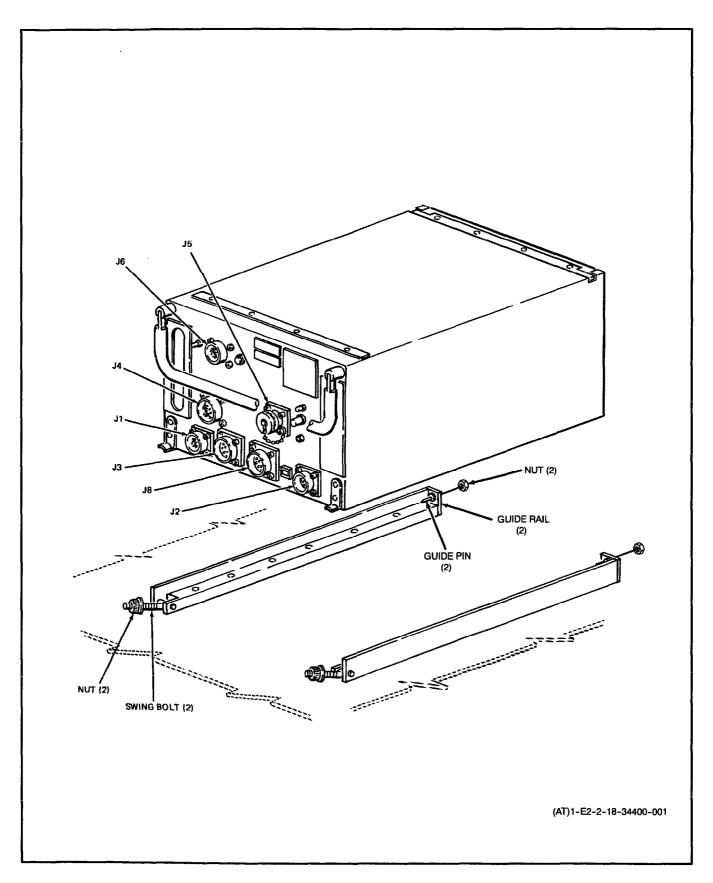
Removal and Installation of JTIDS Receiver/Transmitter Equipment Compartment, Left Side
